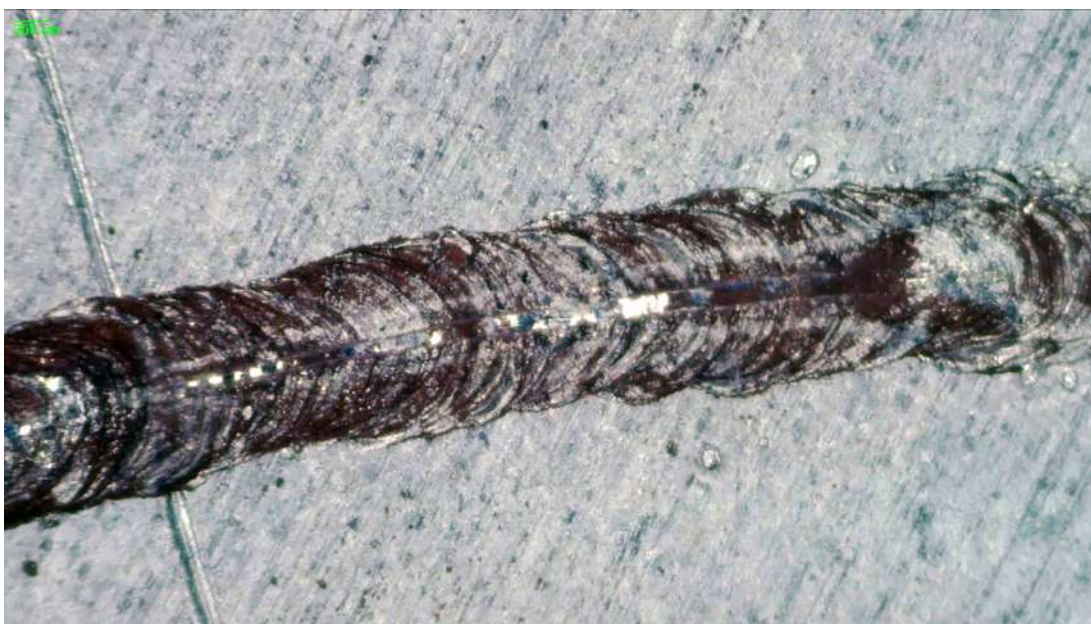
The appearance of the closure area of the annular seam during laser welding
